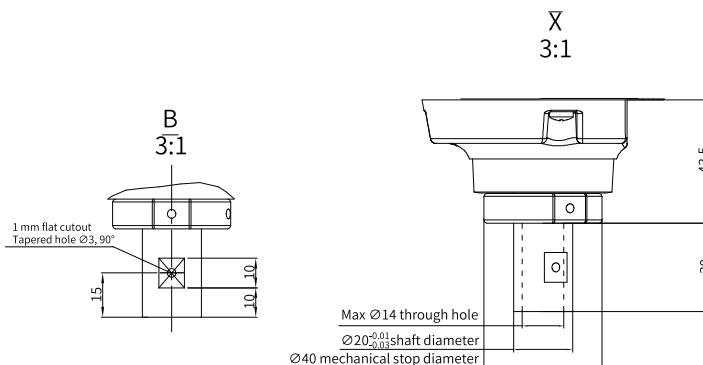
Auxiliary tooling installation dimensions for IR-TS5-55Z15S3 (unit: mm)
